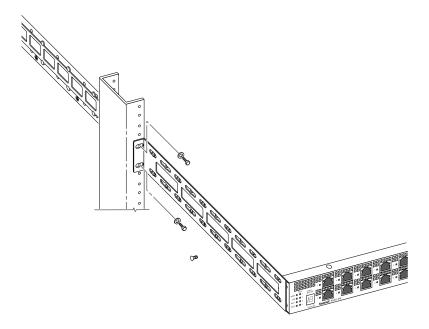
Removing the Front Mounting Screws from a Two-Post Rack
